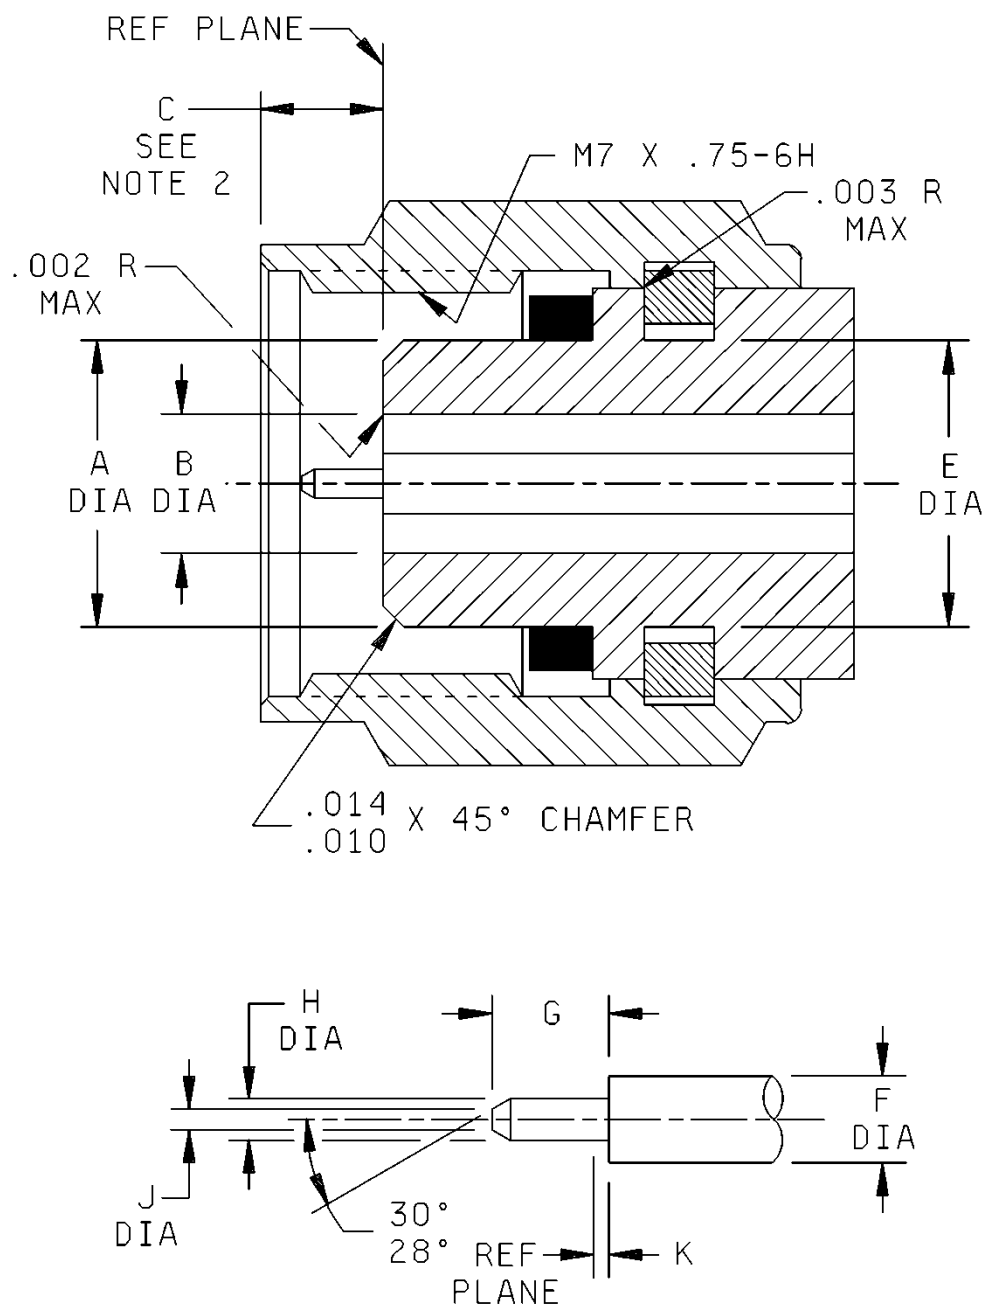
Interface dimensions (2.4 mm) pin contact.
